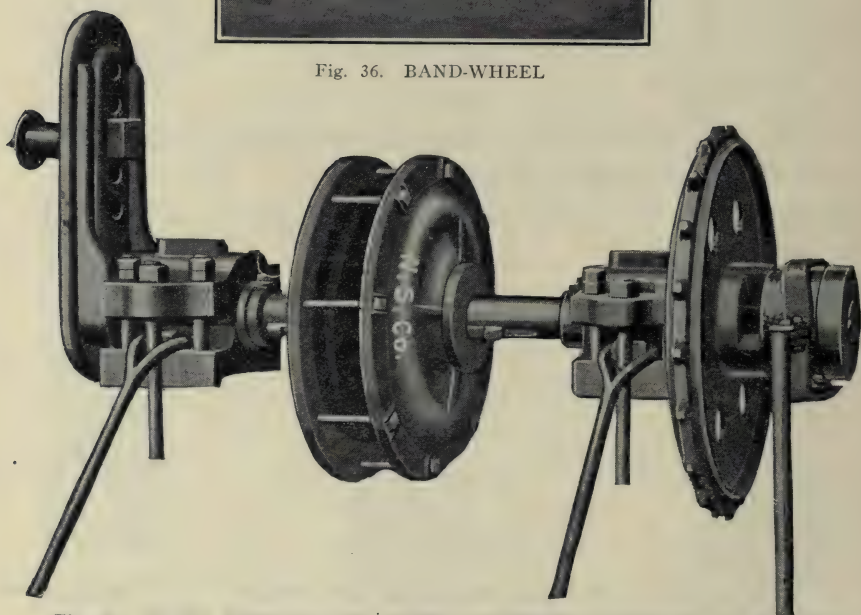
SHAFT WITH CRANK, BOXES, FLANGES, SPROCKET AND CLUTCH
